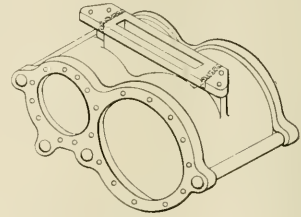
Air Cylinder Lugs Replaced by Gas Welding
